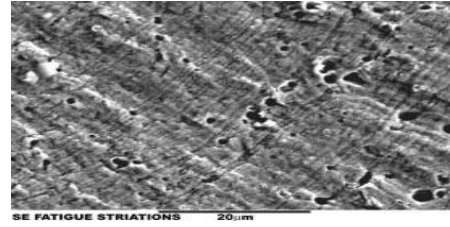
Fatigue striations visible on type 302 stainless steel spring fracture. [3]
